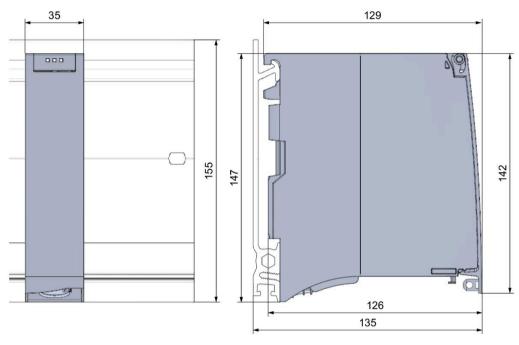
Dimensional drawing of the DQ 64x24VDC/0.3A BA module
